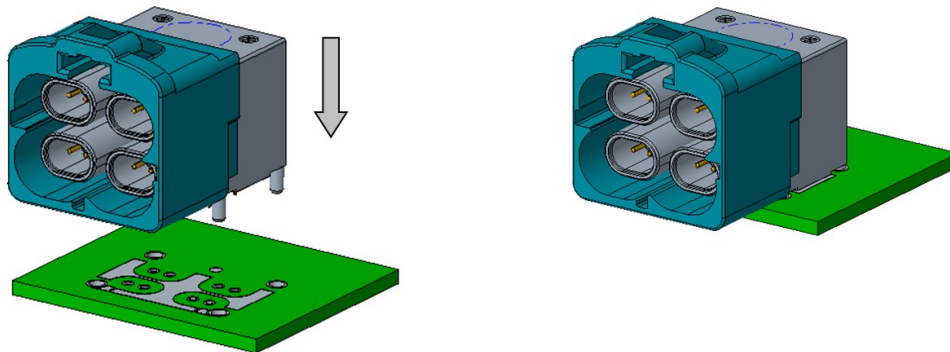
/ Pin Header 4P 90° unsealed, TE-No. 2374900
